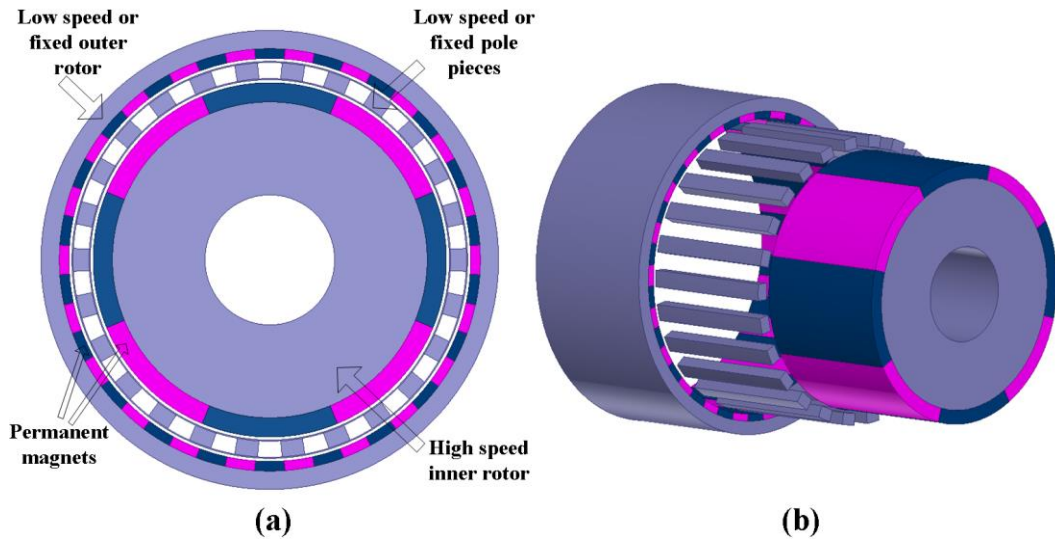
A field modulated magnetic gear. (a) 2D view. (b) exploded view.
